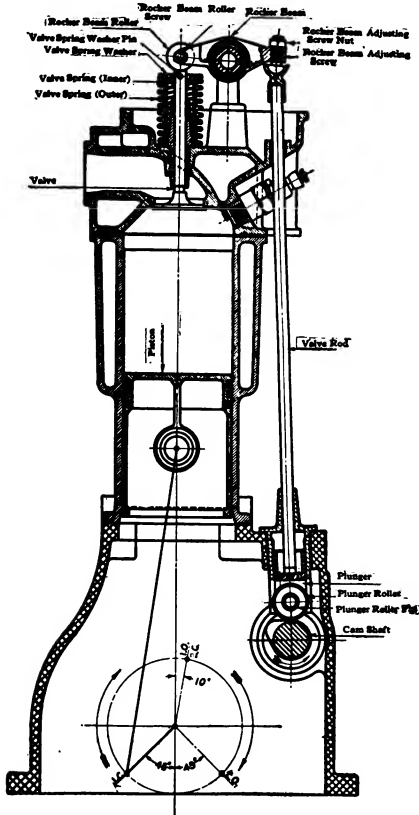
Section through Dorris 1920 I-Head Cylinder as Used with Valve-in-Head Motors
